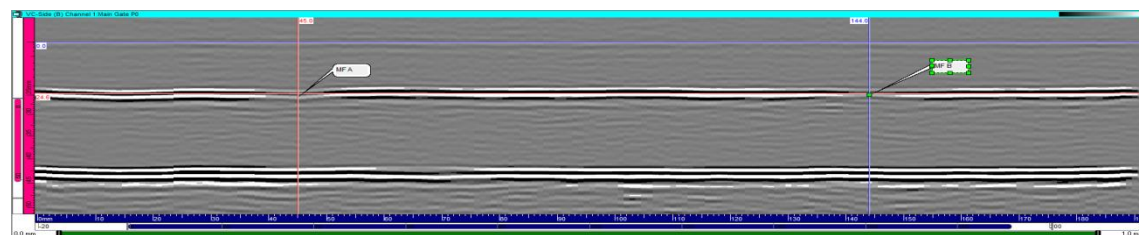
TOFD examination of mechanical fatigue cracks.
